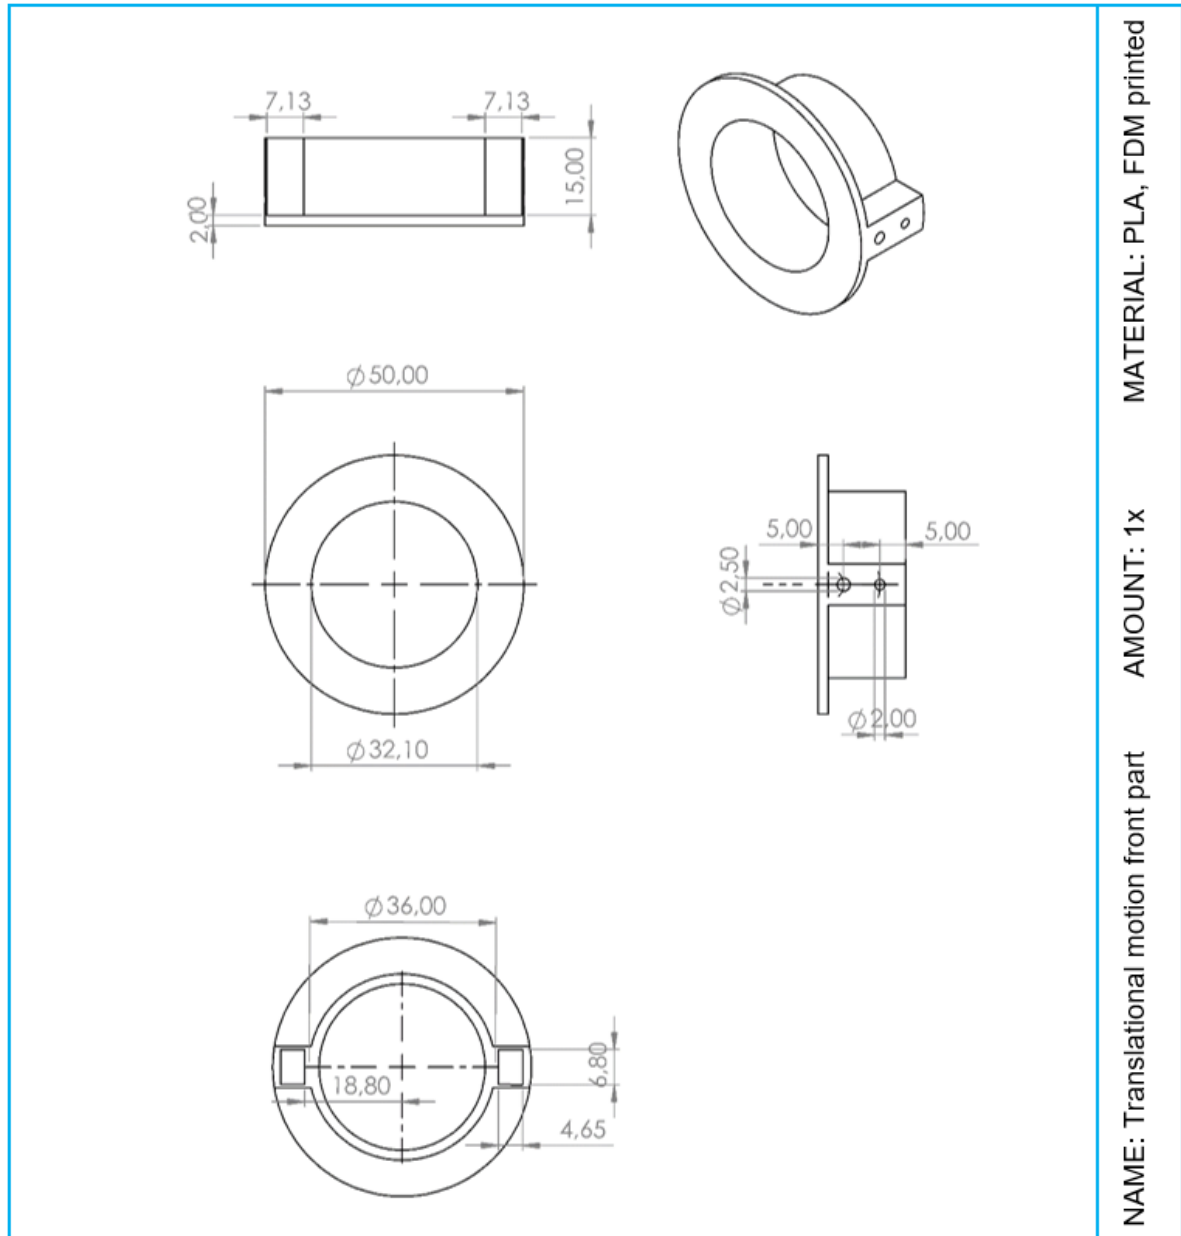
Construction drawings of translational motion front part - 3D Printed prototype
